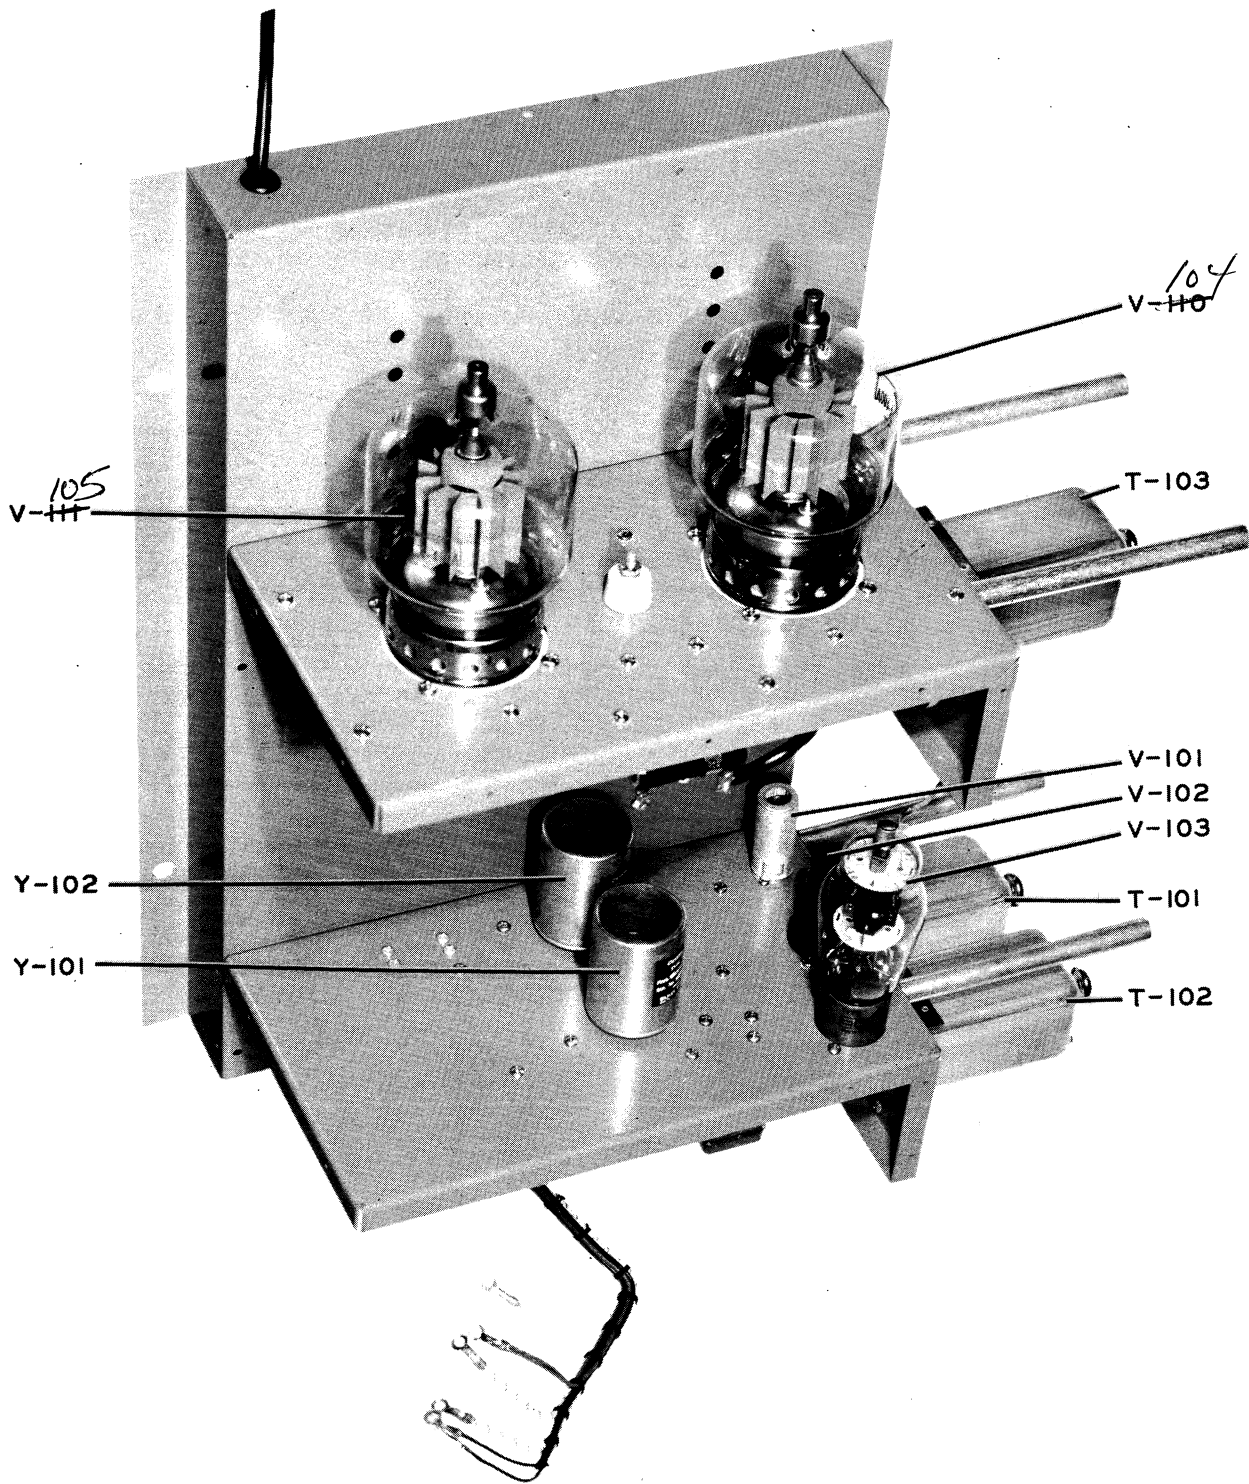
RF CHASSIS PARTS ARRANGEMENT, TOP VIEW
